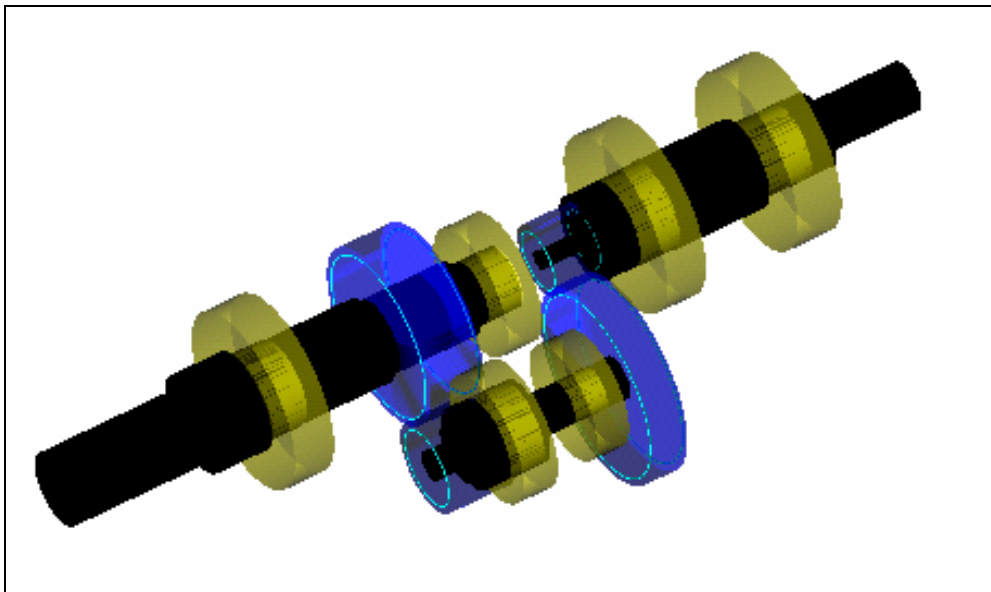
Structure of the gearbox: Black: shafts, blue: gears, yellow: roller bearings
